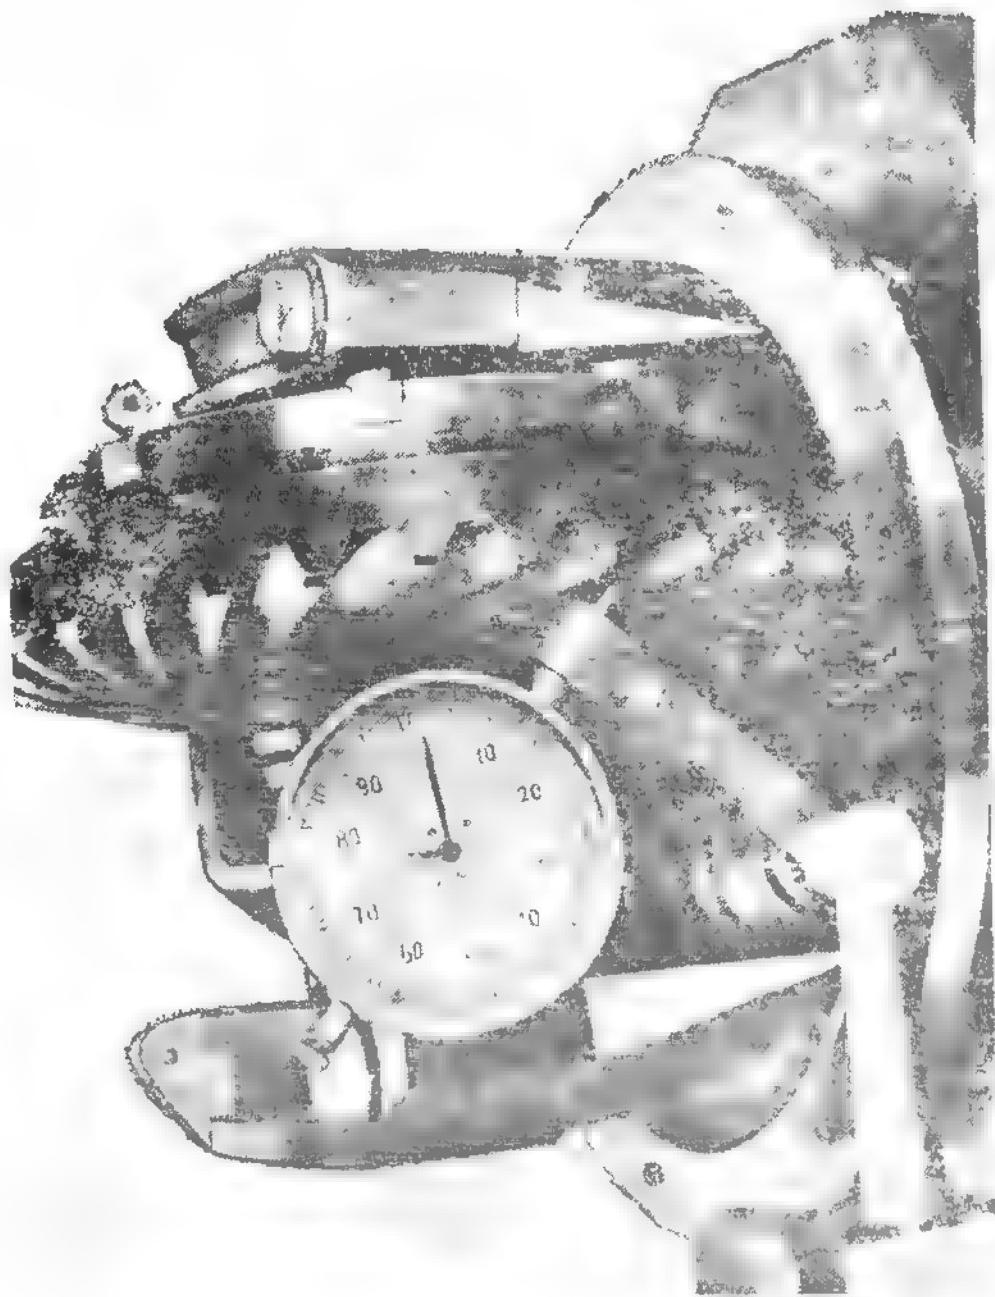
MEASURING CLEARANCE BETWEEN DRIVE PINION
